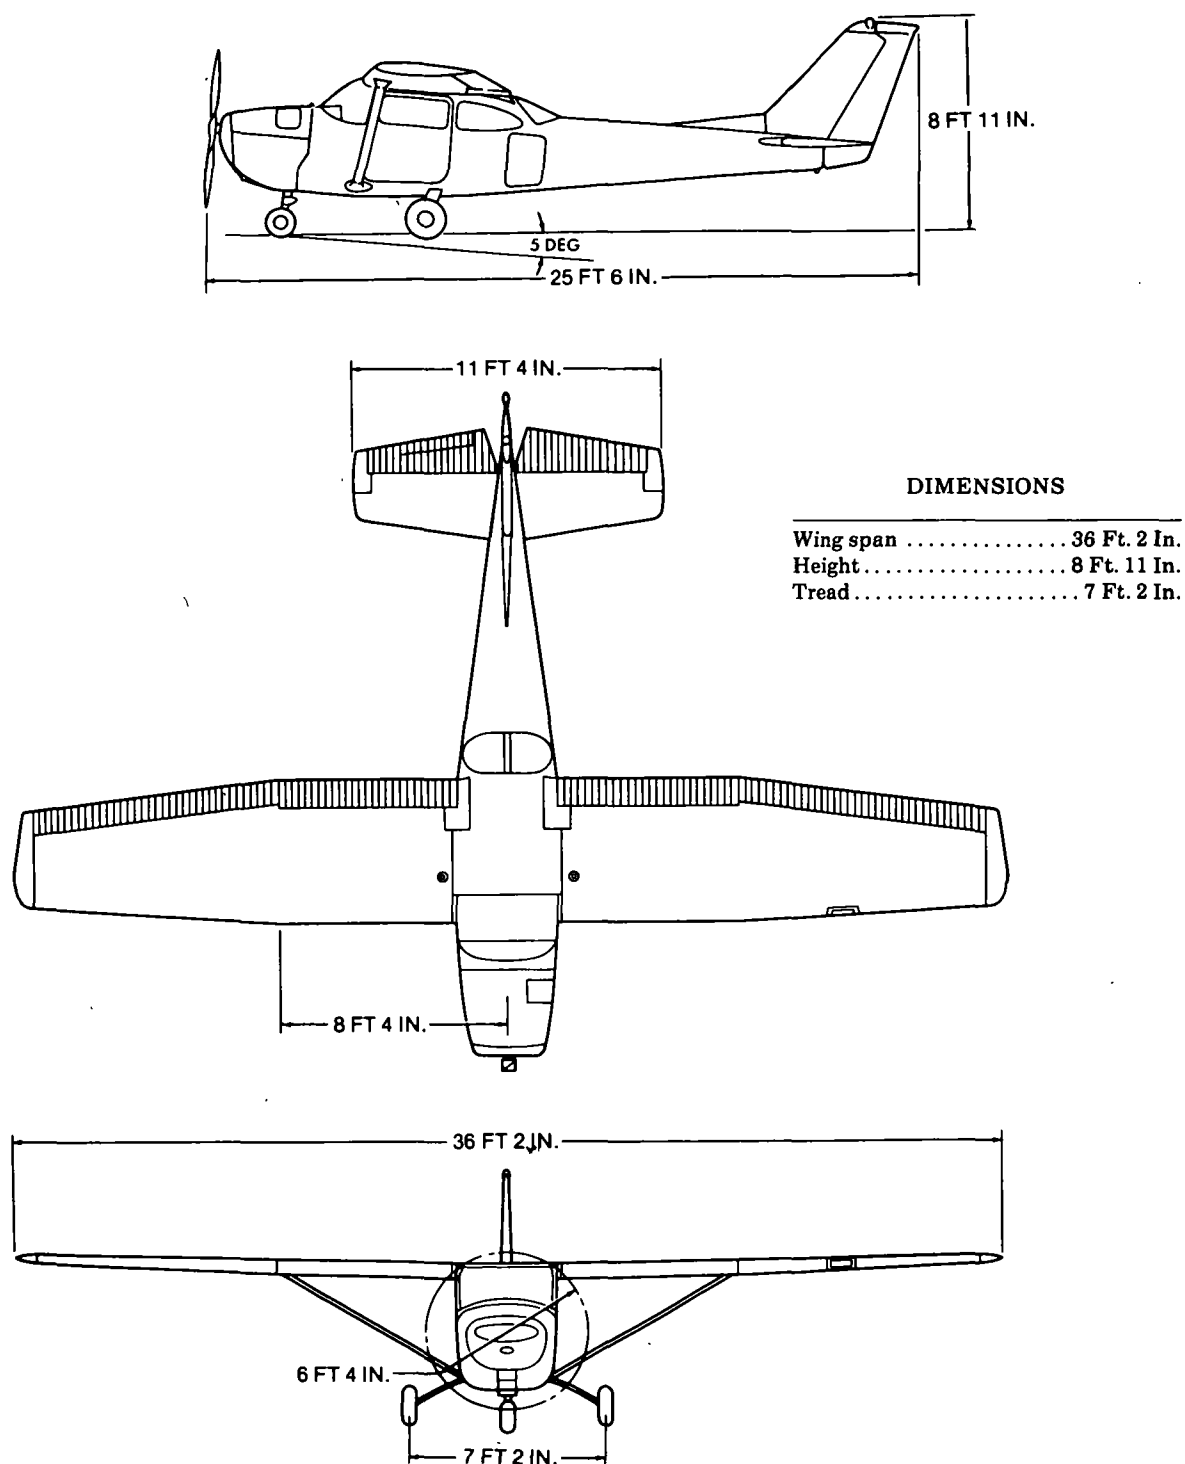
Principal Dimensions, T-41B (Mescalero)
